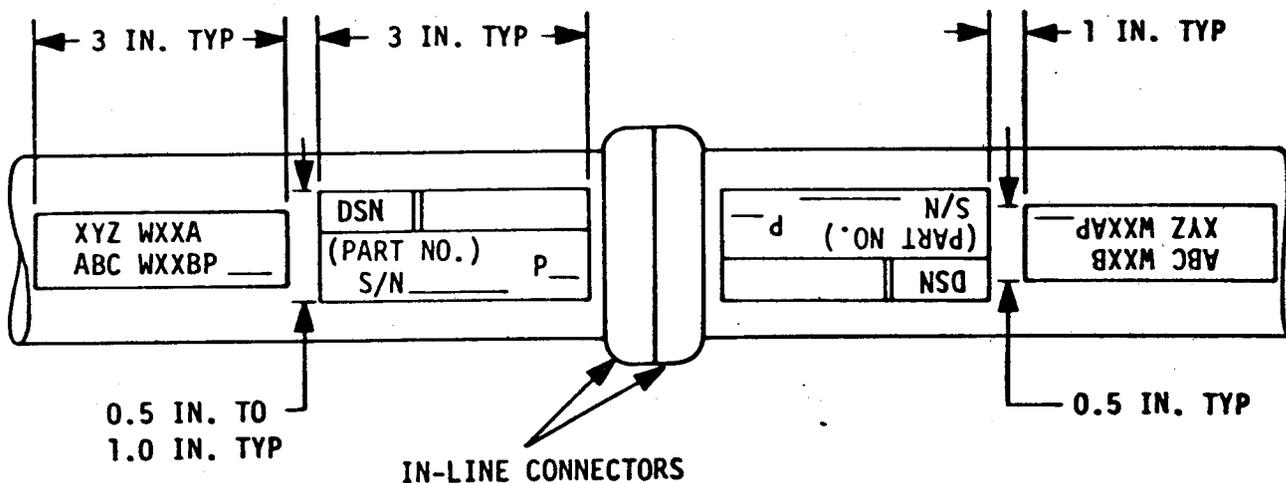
Labeling, Sectioned Cable at In-Line Connectors
